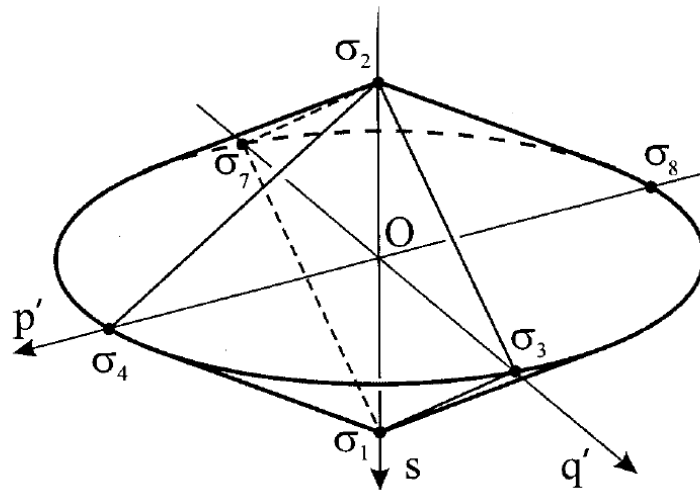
Tolerance map of a rods end with a conventional tolerance. [12]
